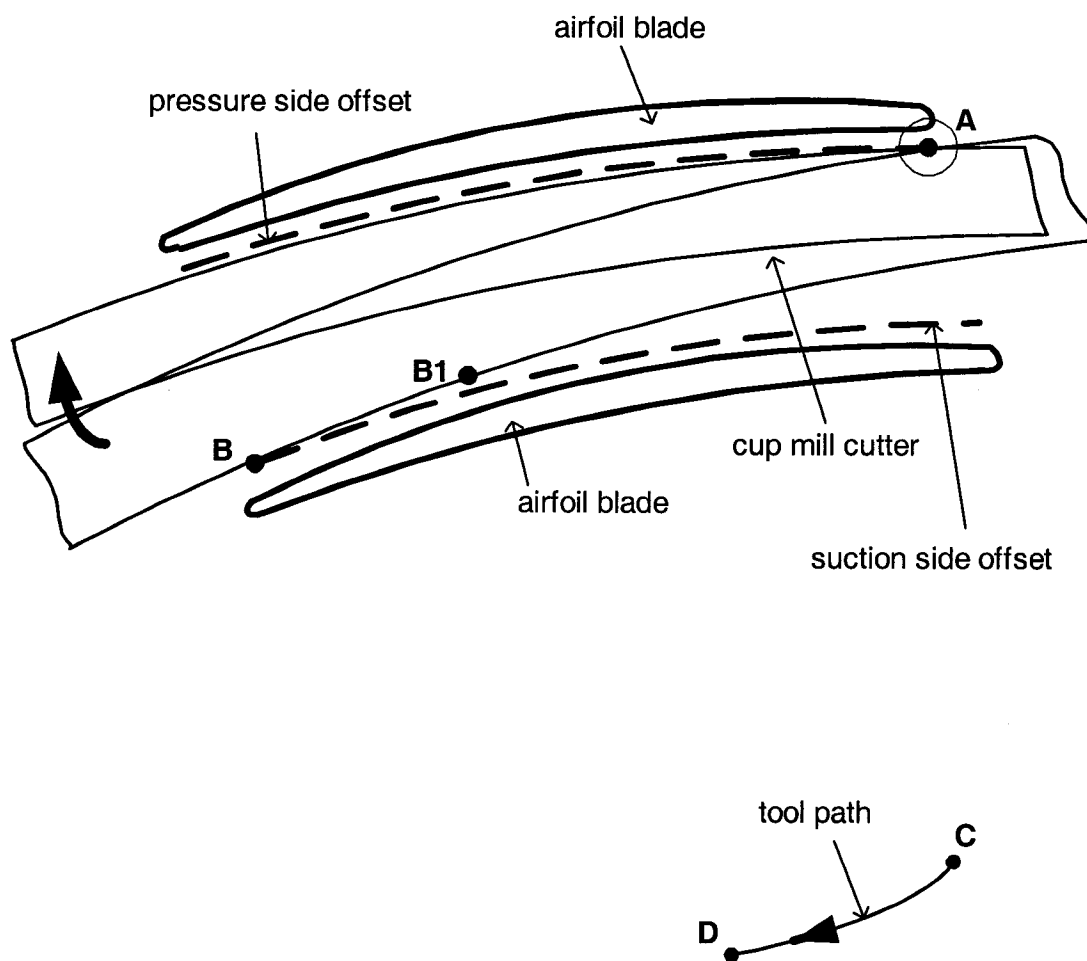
Tool movement in one axial level of machining – tool center rotation around point A
